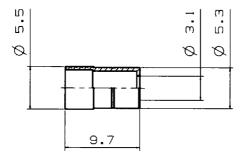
#3-1. Crimping ring (for 3.0mm cord)
